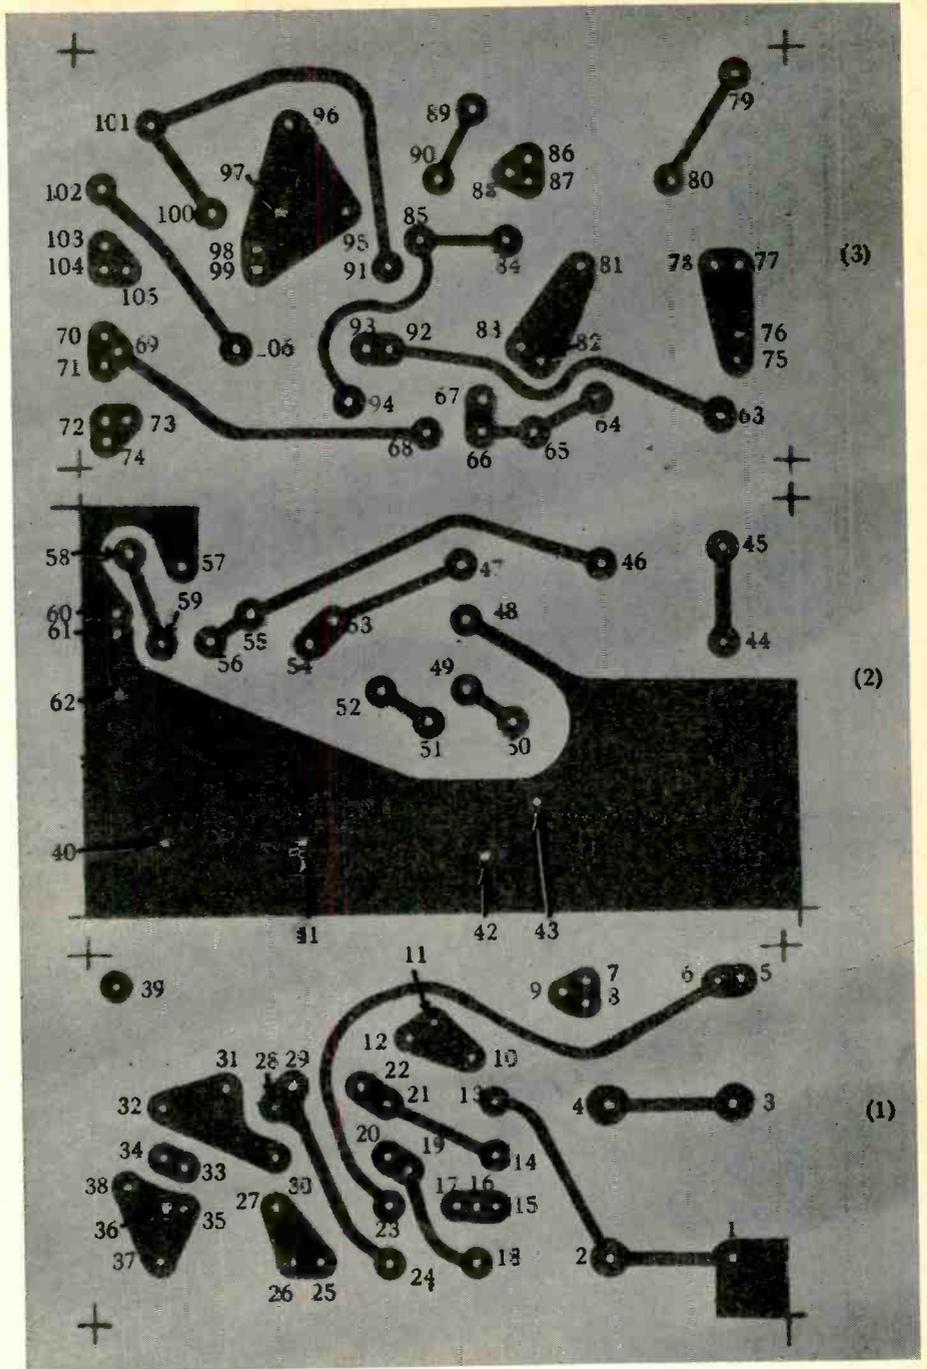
Enlarged layout of printed circuit boards with the holes identified by number.
